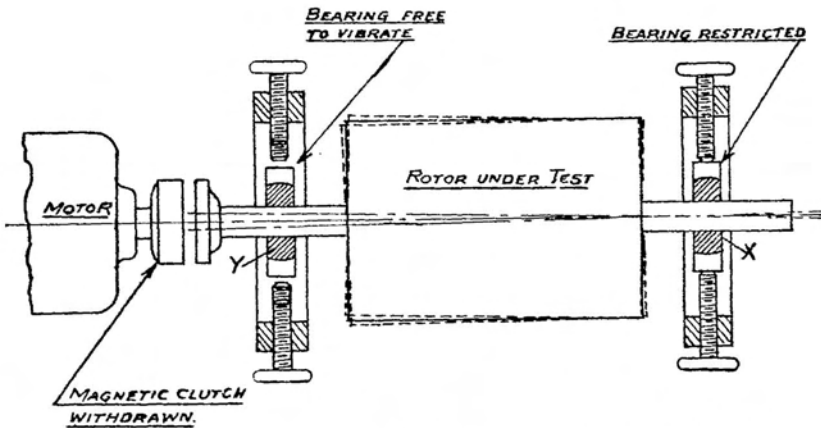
Schenck Machine—Diagram illustrating Method of Supporting Rotor.
